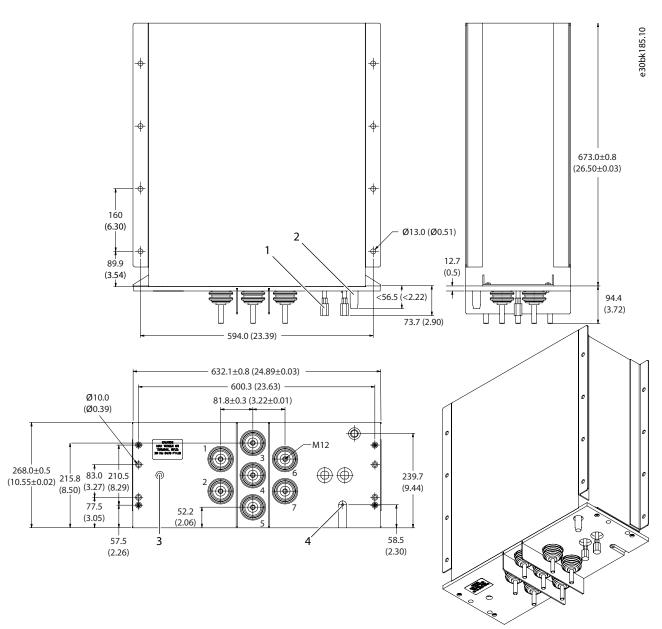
7-terminal DC Capacitor for DFE Dimensions in mm (in), Enclosure Size H30/L30
